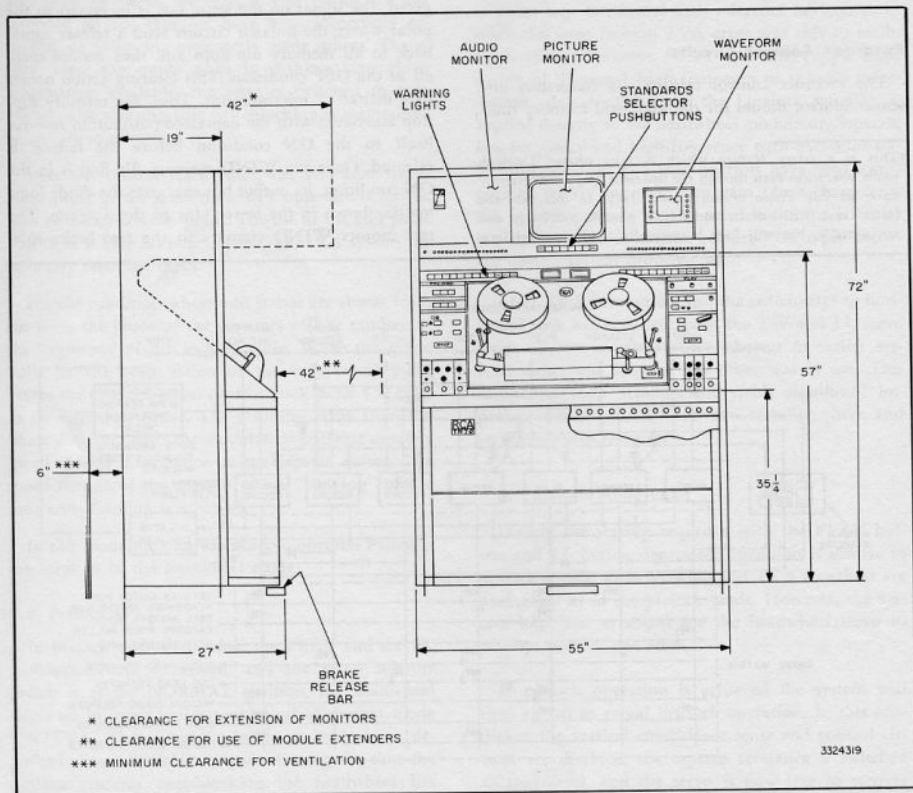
Outline Drawing Showing Overall Dimensions of TR-70 Recorder
